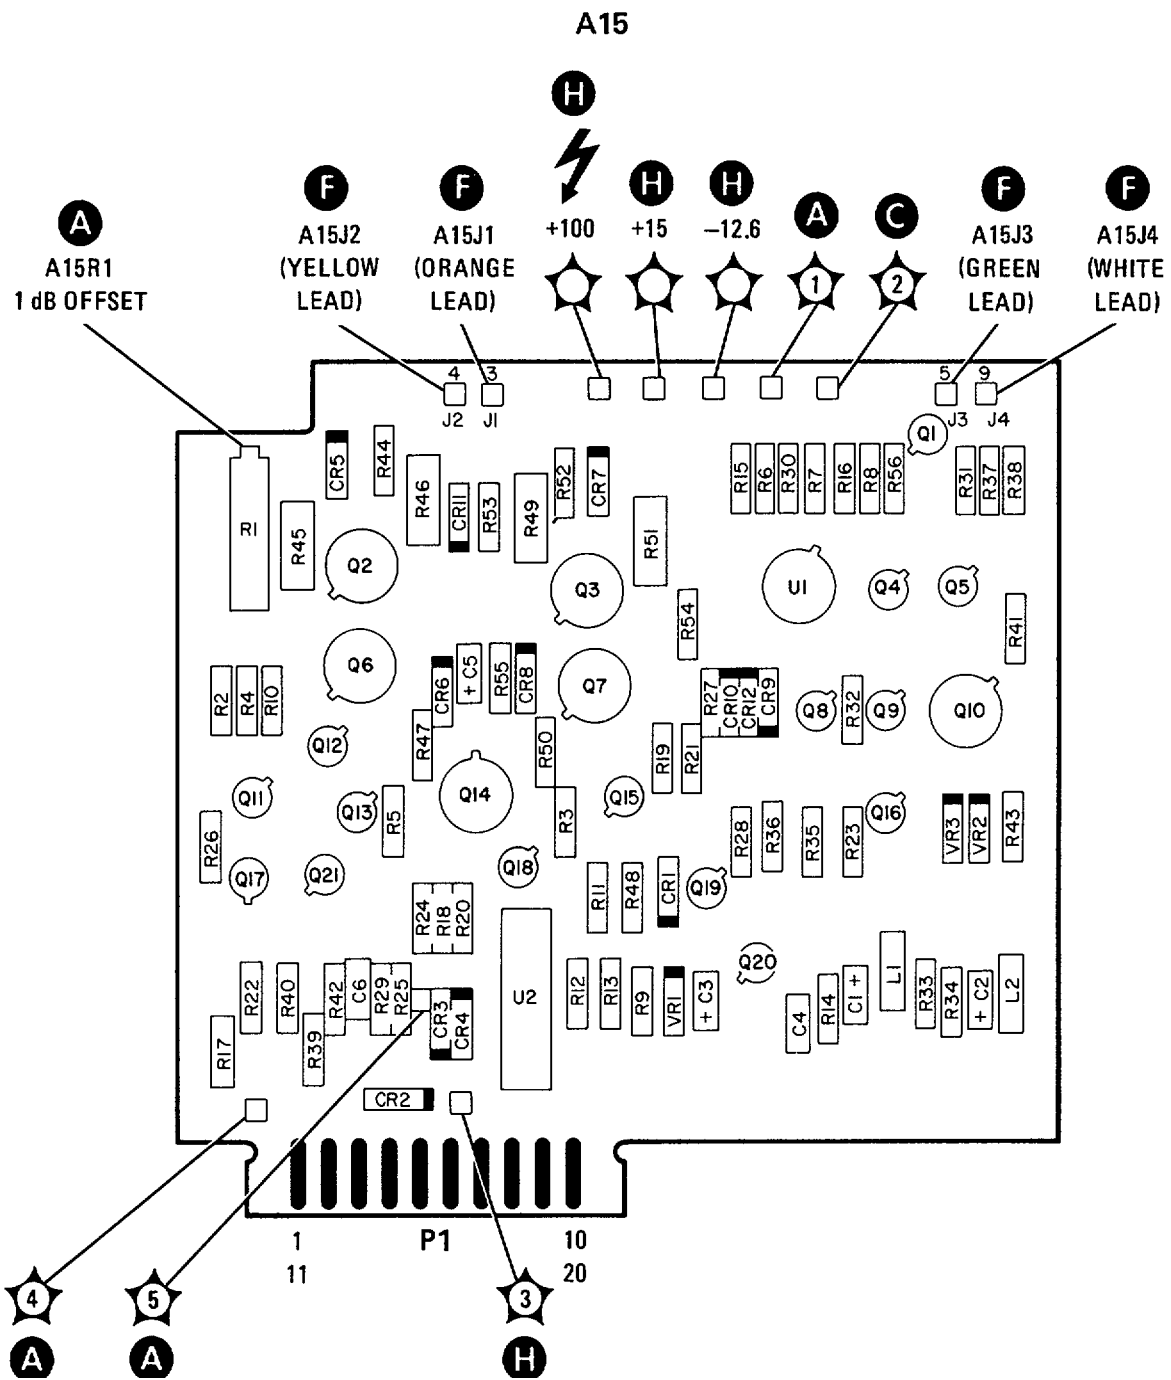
A15 Vertical Driver and Blanking Assembly, Component and Test Point Locations
